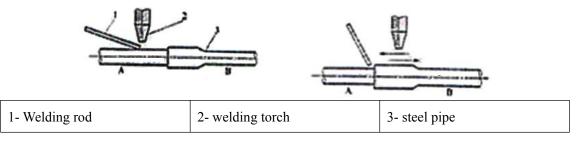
Welding of welding rod and insertion tube Figure 2-12 Heating sleeve
